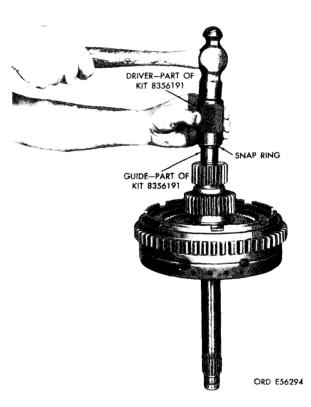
Installing low-range sun gear snap ring using driver and guide (part of kit-5120-572-8663 (8356191)).
